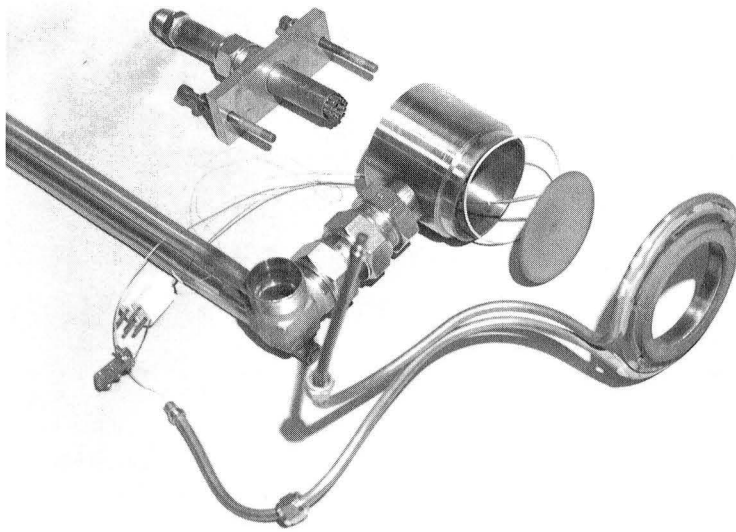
Exploded View of Calibration Fixture to Position the Test Sensor in Front of the Quartz Lamp Bank
